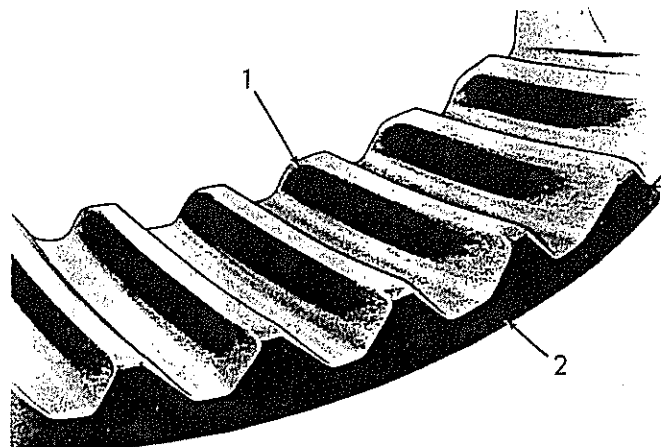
Satisfactory Tooth Contact - Gears Loaded (T-31449)
